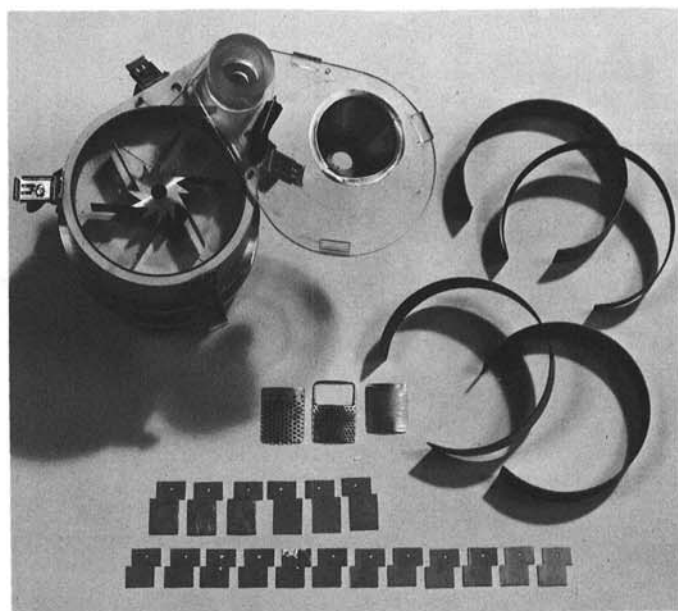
Partially assembled grinding chamber and cyclone collector with an array of alternate machine components.
